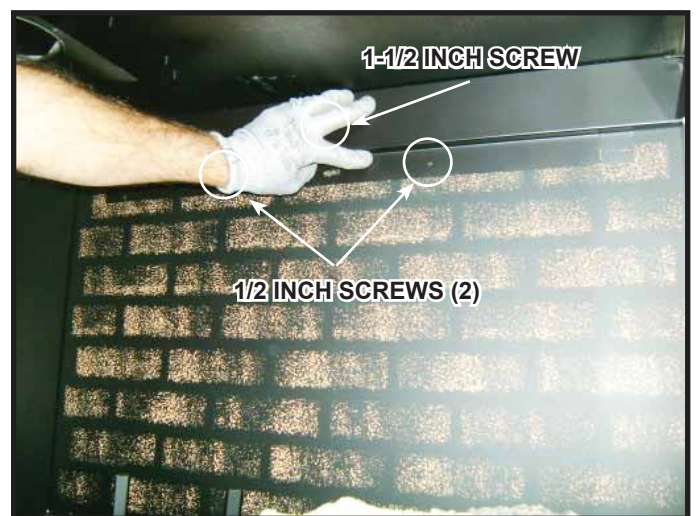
Install Insulation Cover Panel Top - Screw Locations
